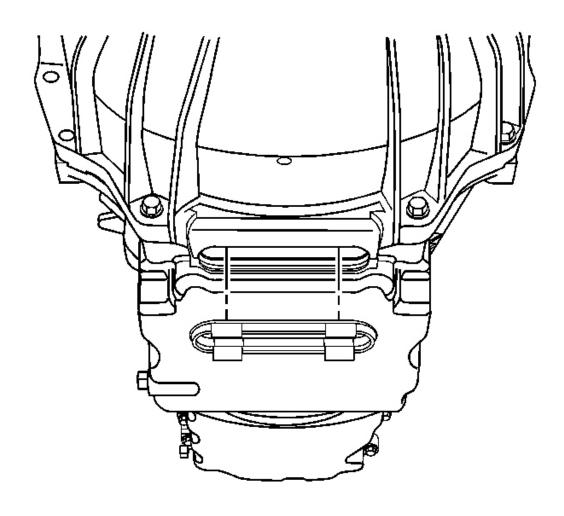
View Of Service Slot Plug Courtesy of GENERAL MOTORS CORP.
